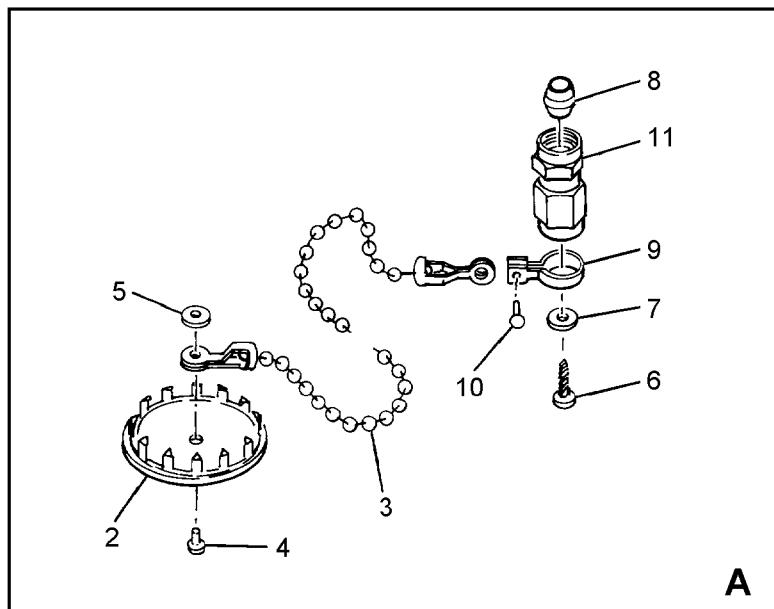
Lid Assembly (Sheet 2 of 2)
